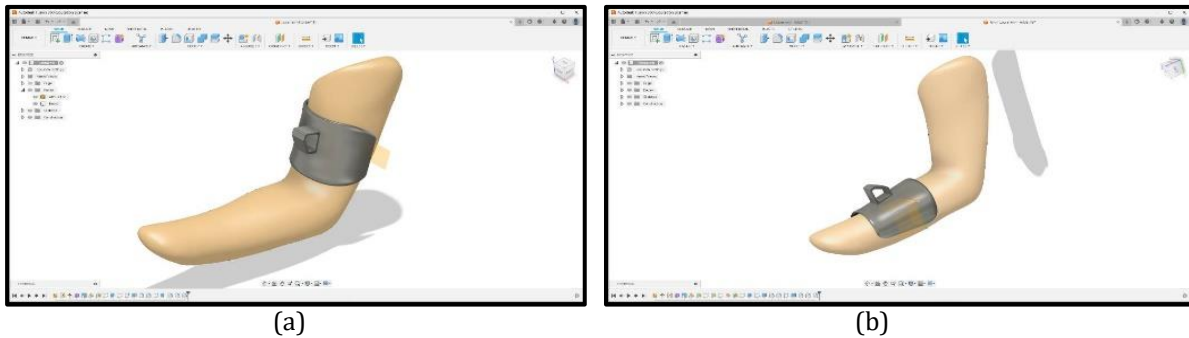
Designing the (a) upper arm holder and (b) lower arm holder using AutoDesk Fusion 360
